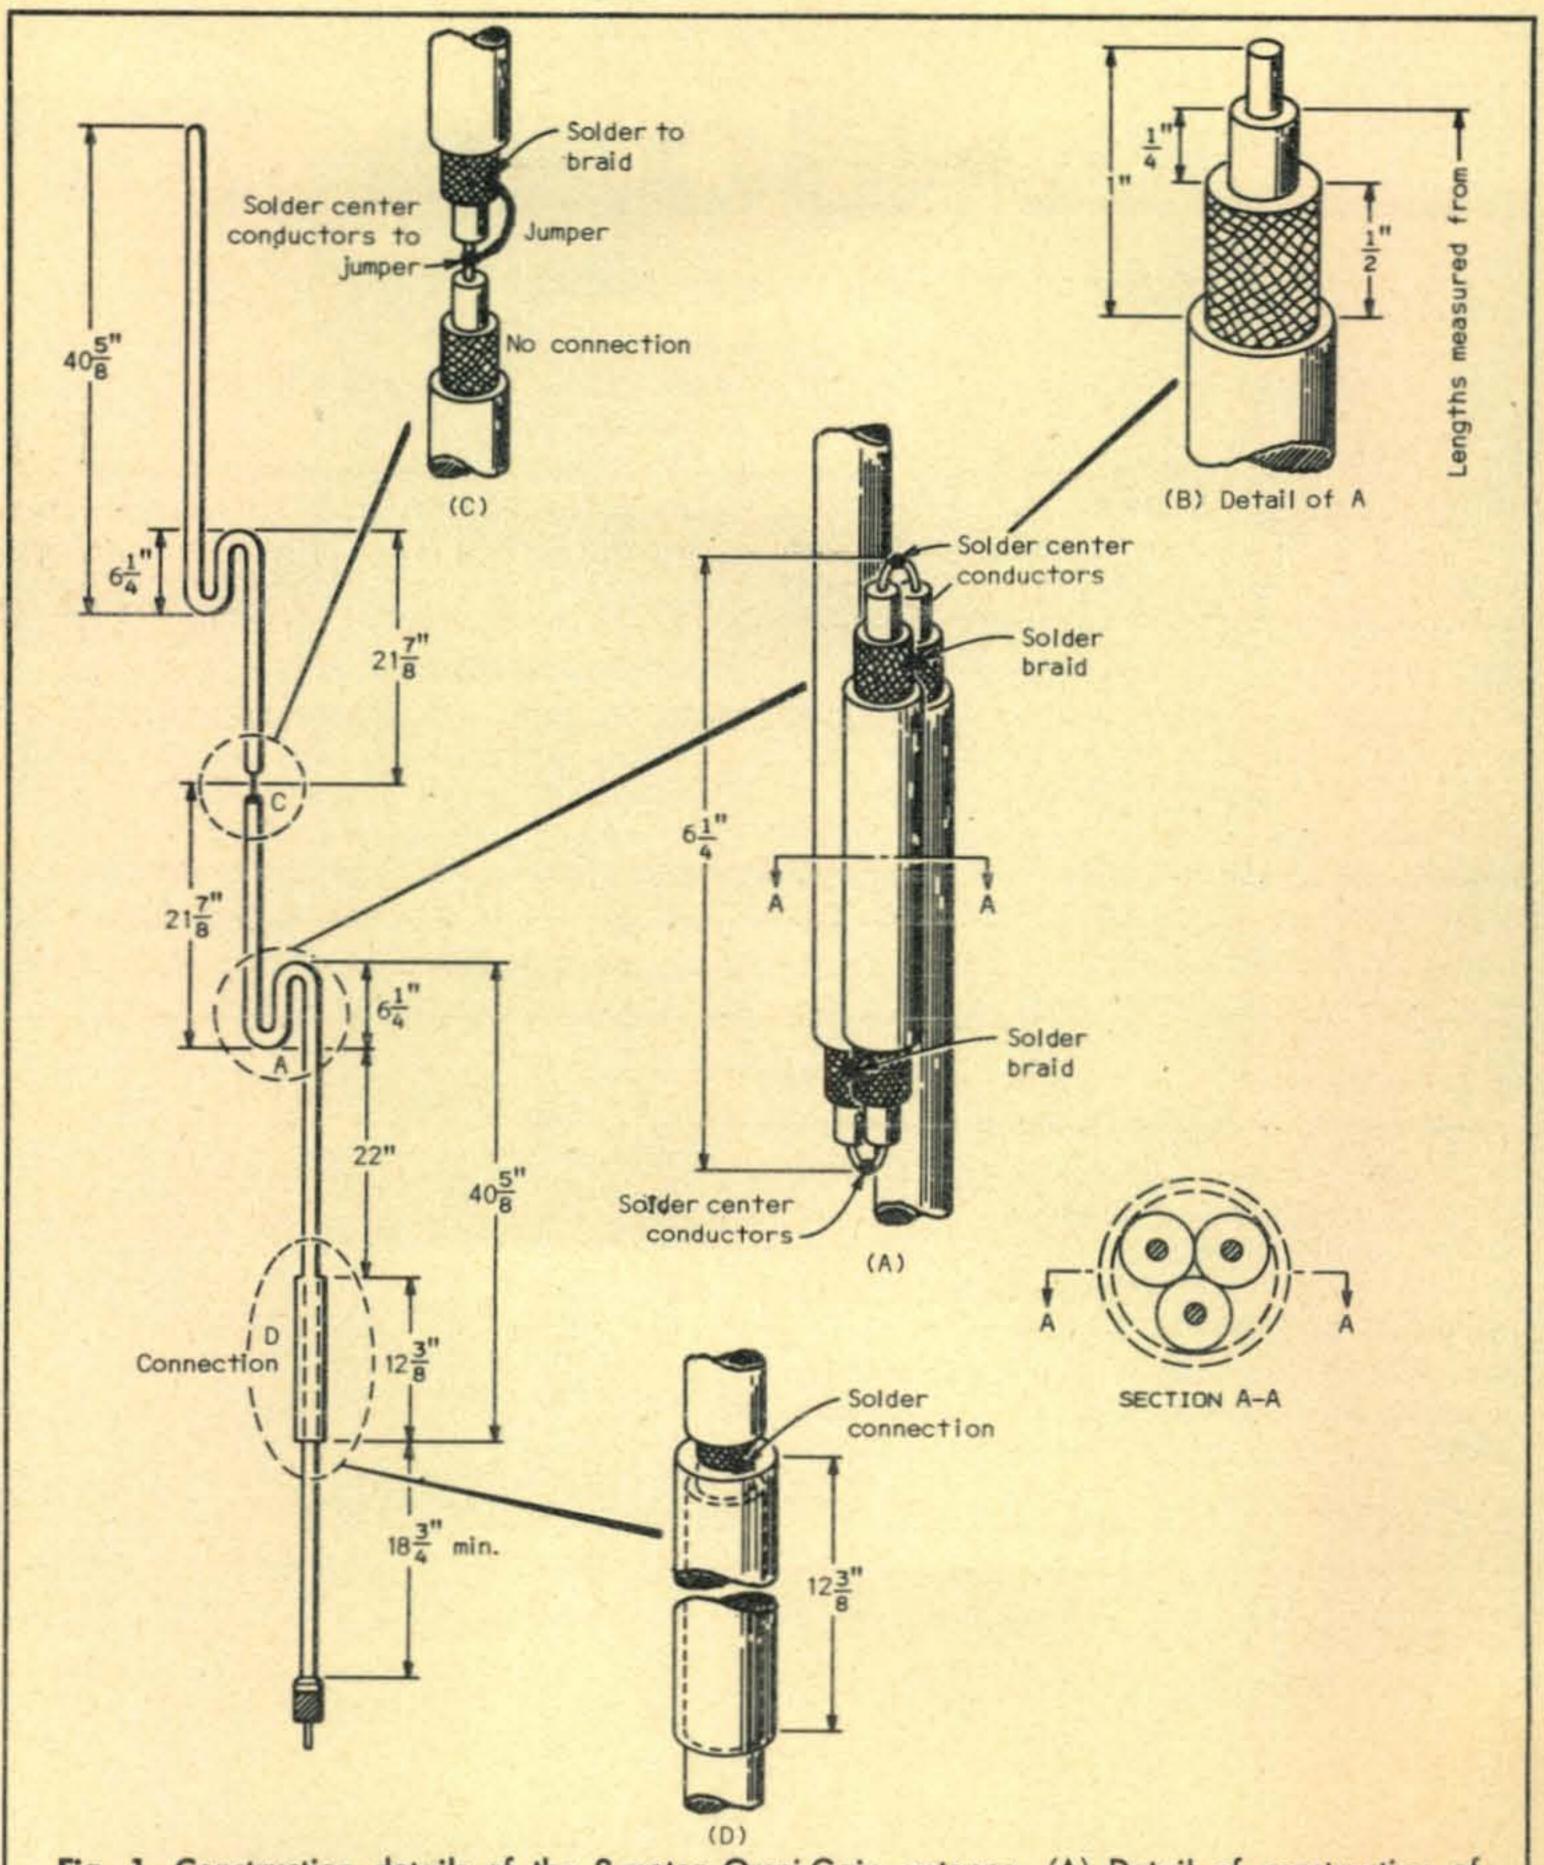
Construction details of the 2-meter Omni-Gain antenna. (A) Detail of construction of folded section. (B) Preparation of ends of RG-8/U coax for folded sections. (C) Assembly of center feed point. (D) Assembly and connection of de-coupling sleeve.
